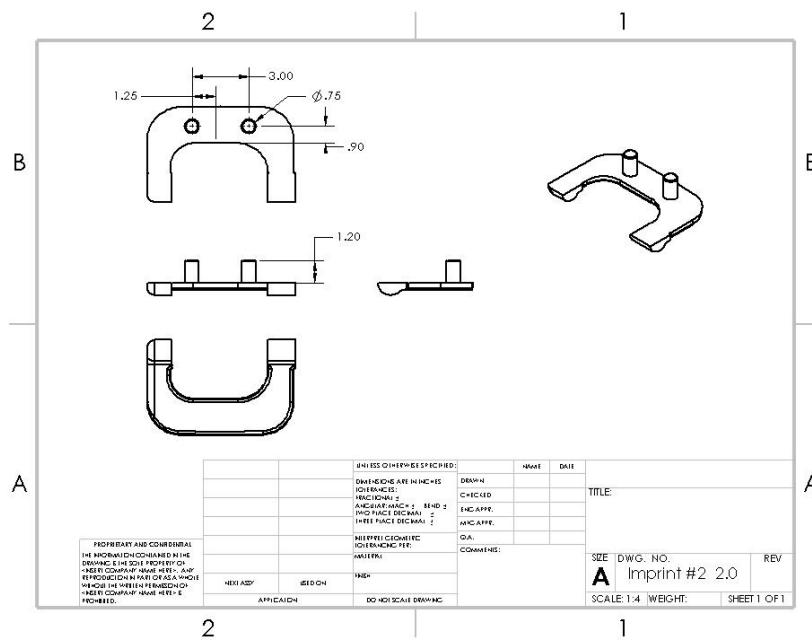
Imprint 2.0 Test Print: Error Recorded, Failed to print continued drafted edge of Fillet
